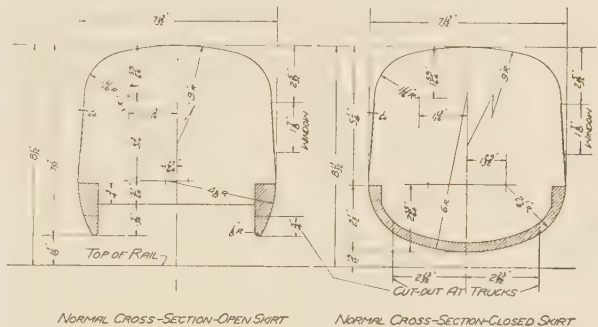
CLOSED AND OPEN SIDE-SILL SKIRTS
